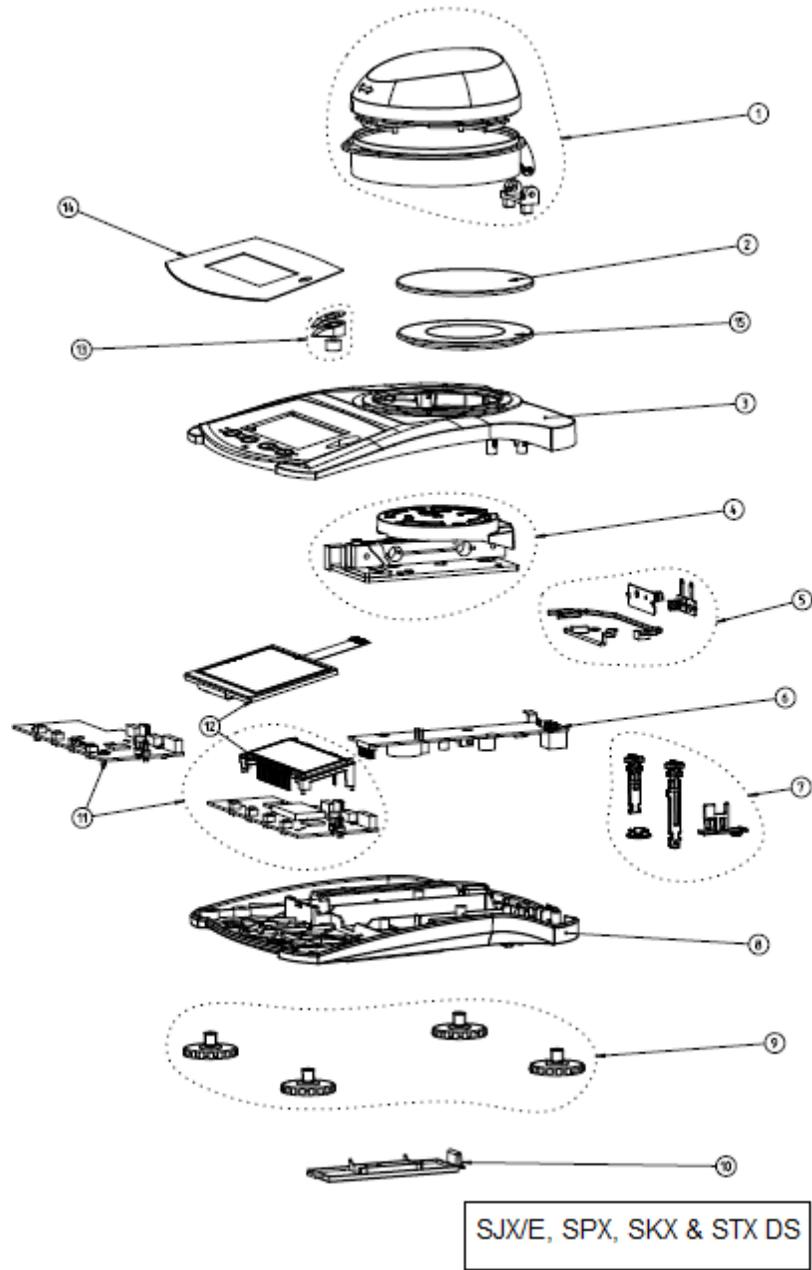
SJX/E, SPX, SKX, STX Draft Shield Models: Housing & Parts.
